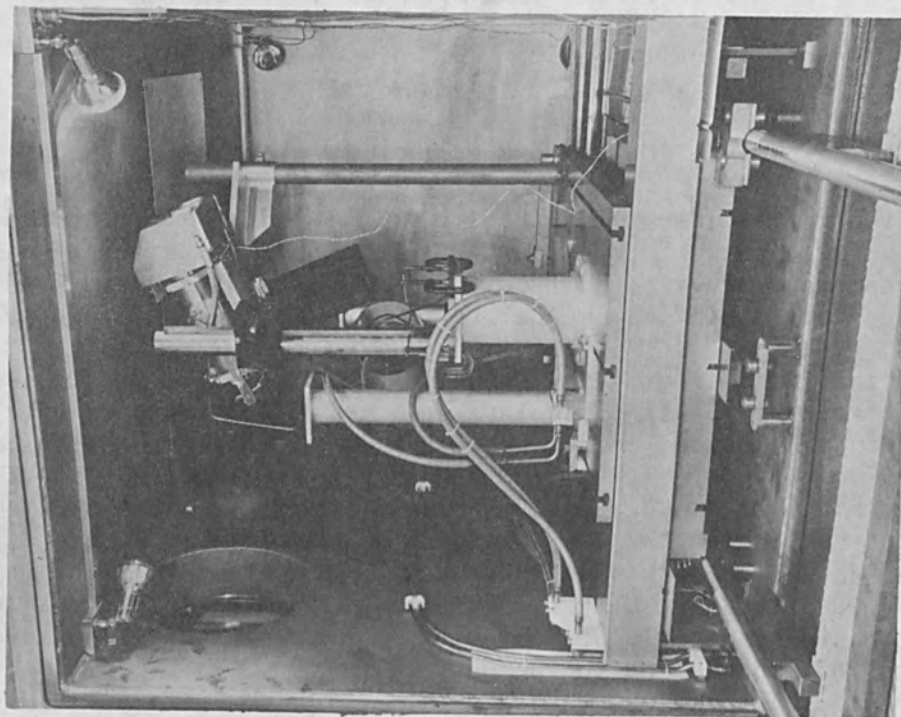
Interior of weld chamber. Rotary fixture with cryopanel for welding accelerating structure mounted on X-Y table.
